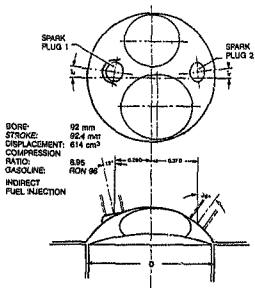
Combustion chamber design of single cylinder engine with dual ignition
